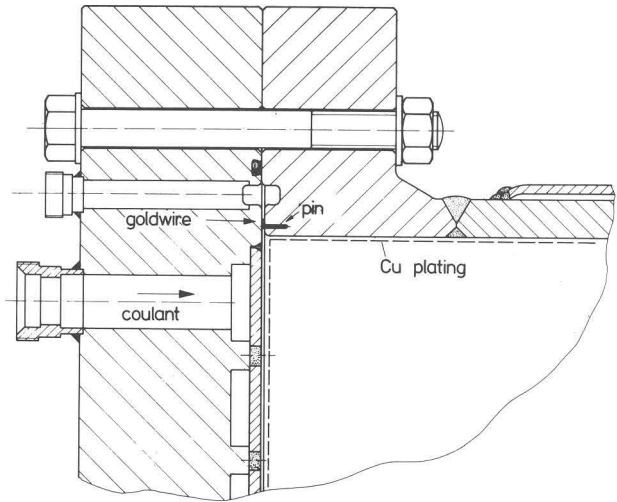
End wall sealed by a gold wire to the cavity flange. The gold wire is held in place by small pins. A backing vacuum groove allows leak checking individual seals.
